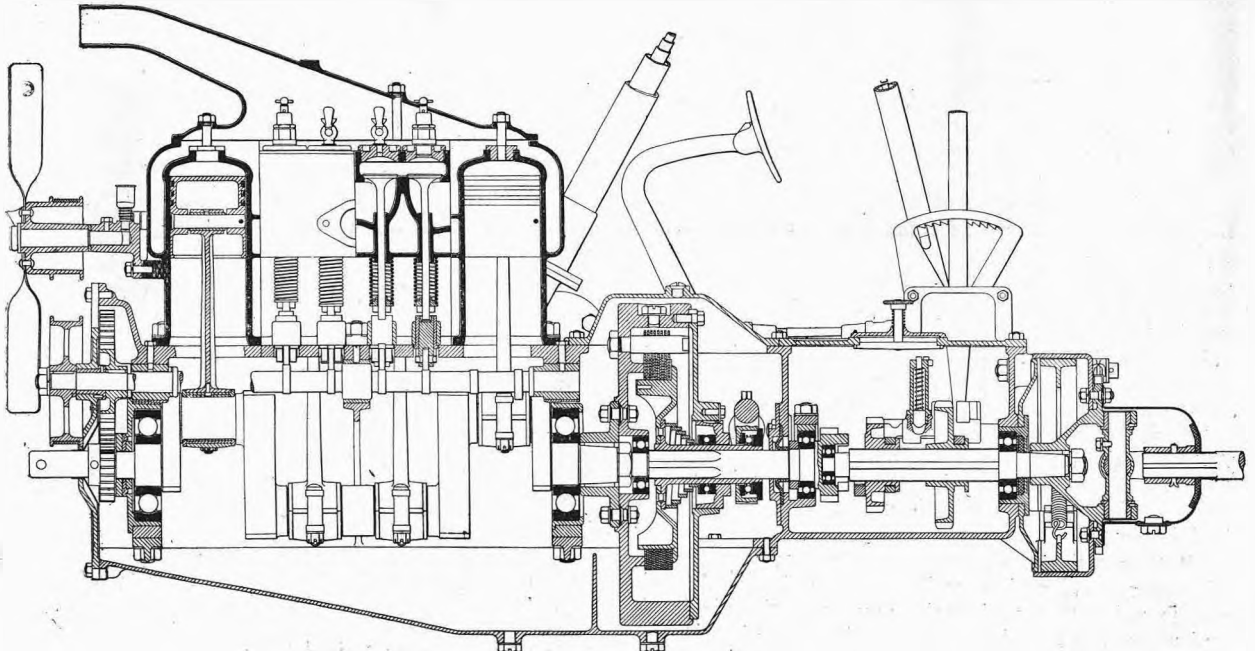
A vertical longitudinal section of the engine, clutch, gear-box, and forward propeller-shaft joint, en bloc.
